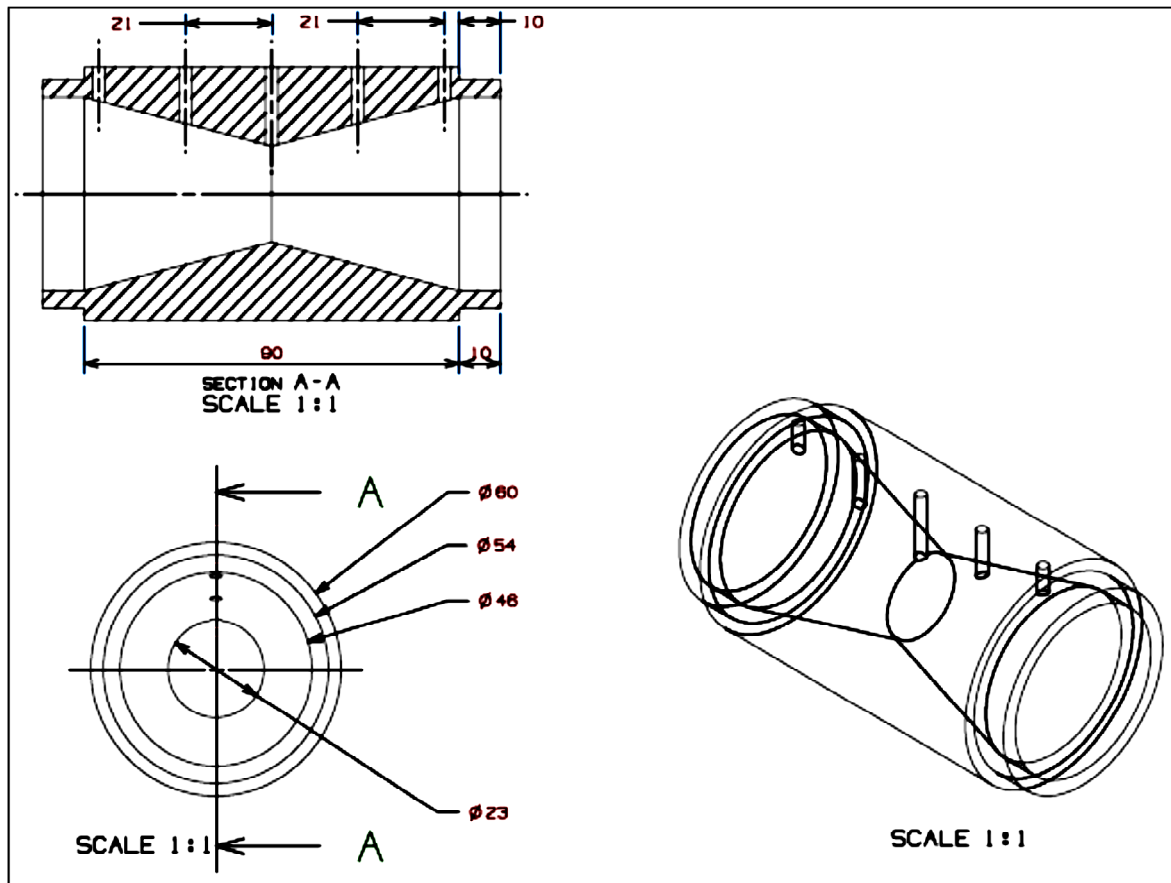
Drawing of C-D tube with $\beta = 0.5$; $\theta = 30^\circ$
